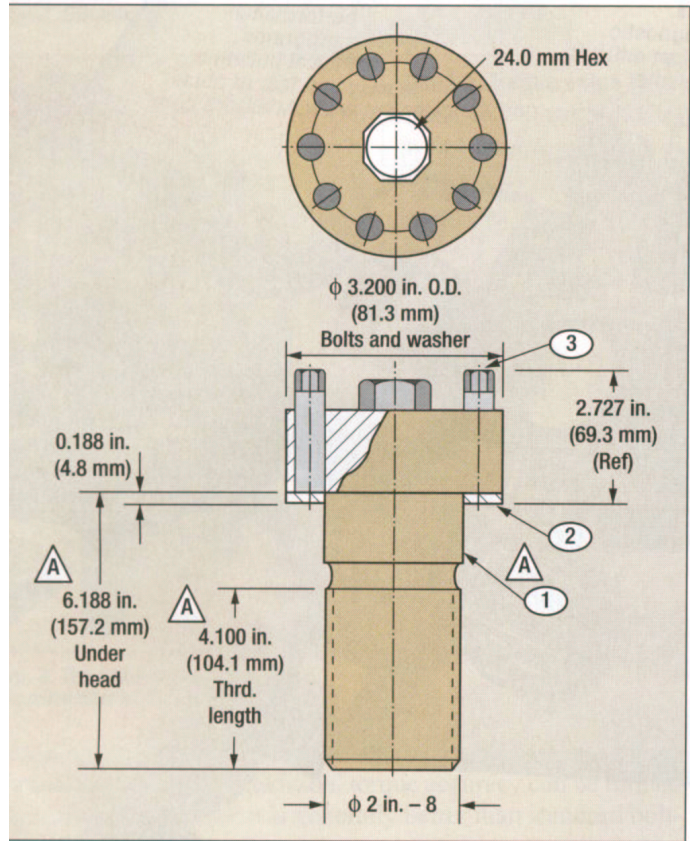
Cross-section of an MJT used to replace the original bolts.
